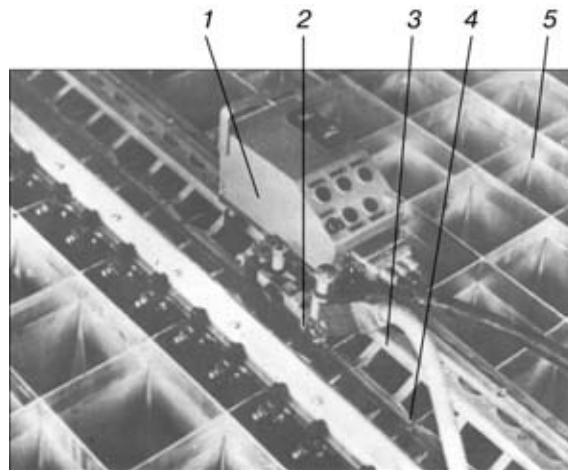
A-1284 automatic machine for welding longitudinal and transverse welds (for designations see the text)
